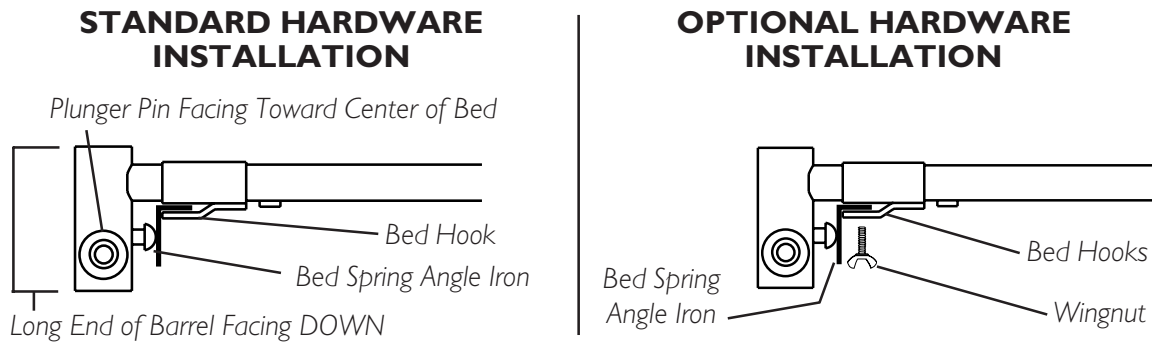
INSTALLING THE CROSSBRACES - BARRELS
